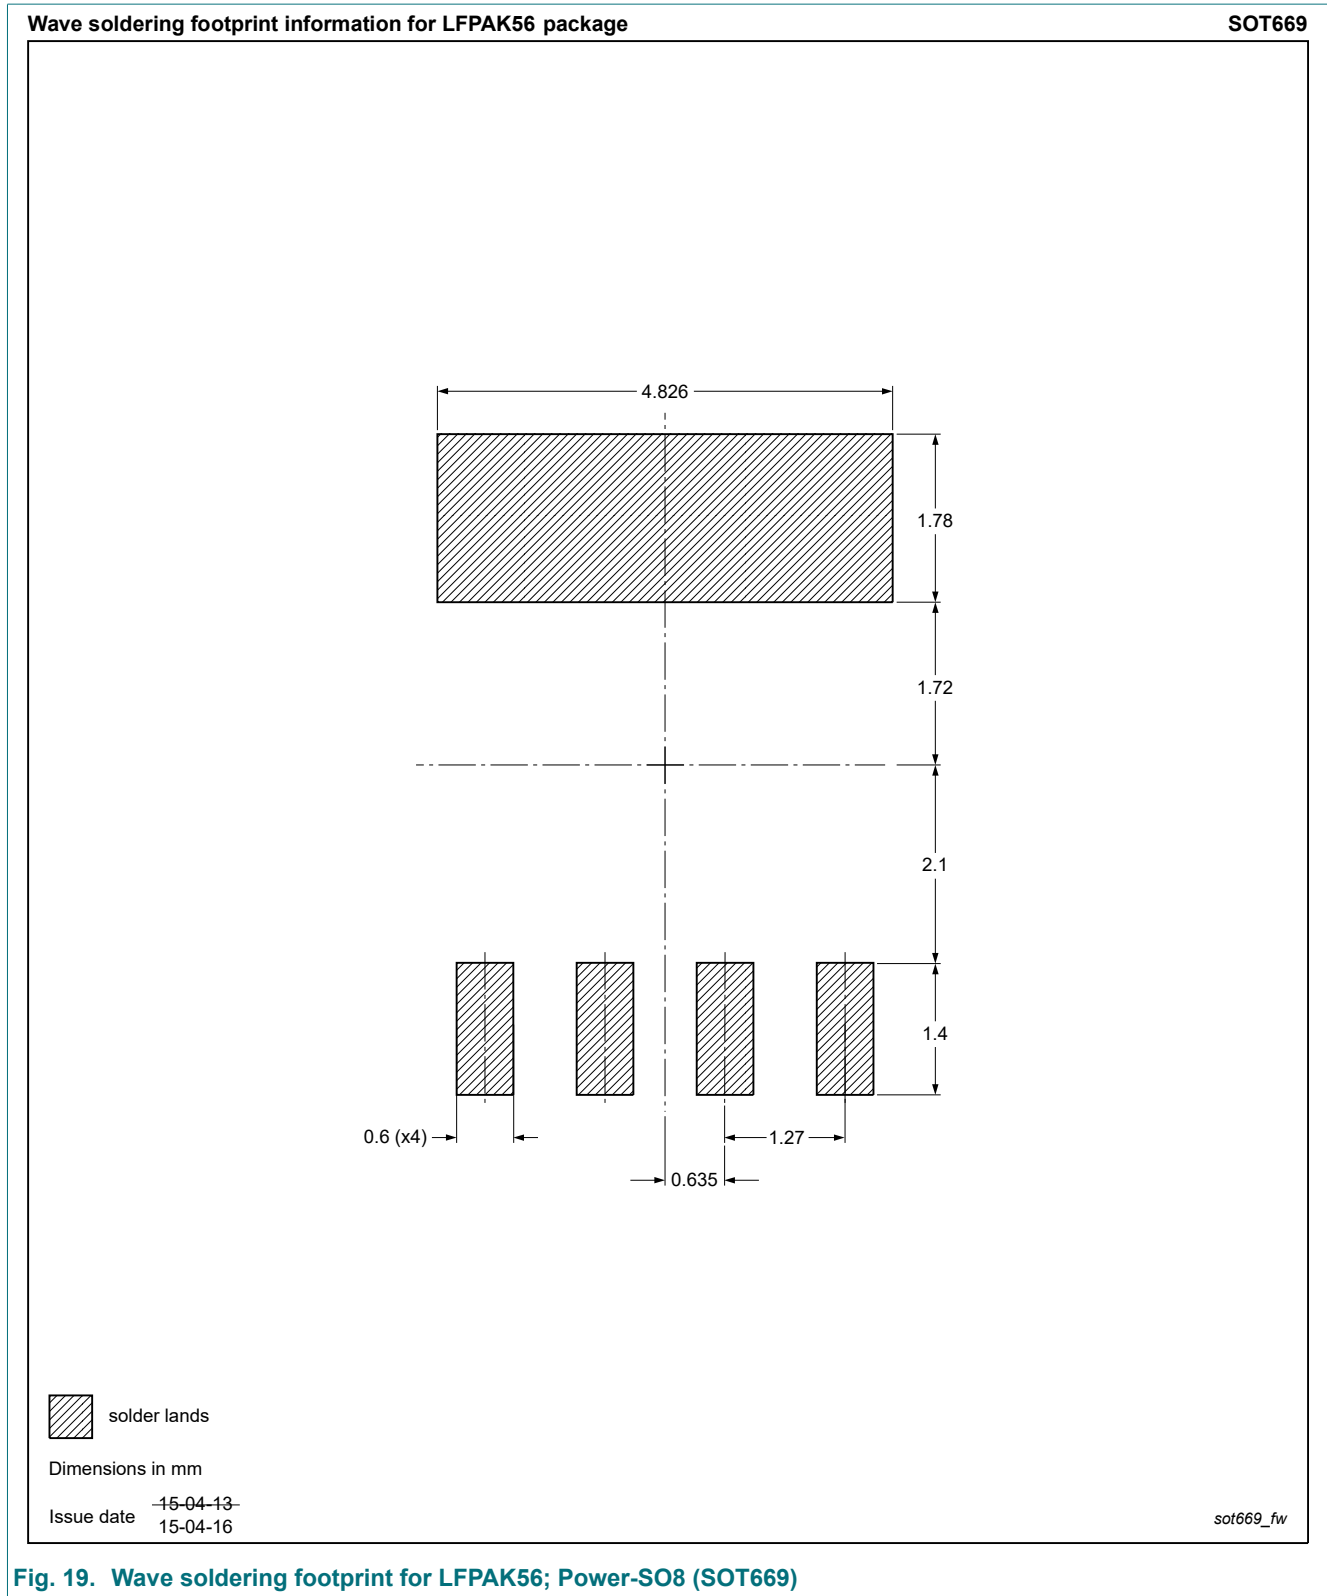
Wave soldering footprint for LPAK56; Power-SO8 (SOT669)
